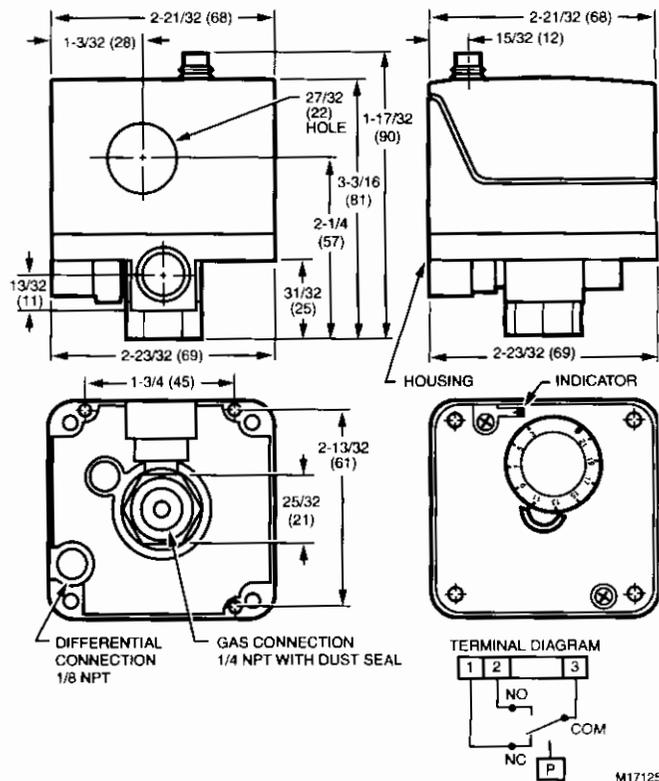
C6097 1/4 in. NPT Mount dimensions in in. (mm).
